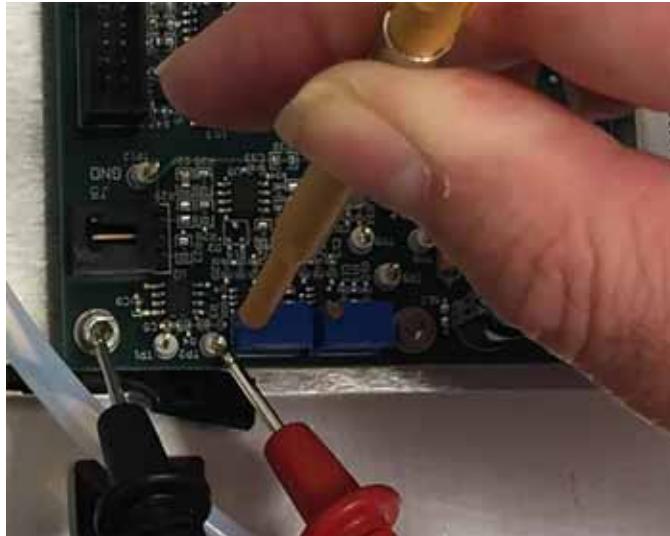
Pump PCB Potentiometer Adjustment
